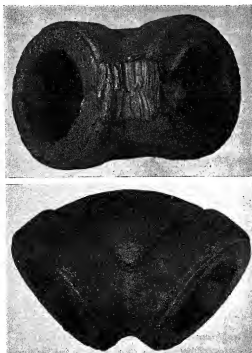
Showing castings before and after the removal of excess metal by the Arcair Torch.
